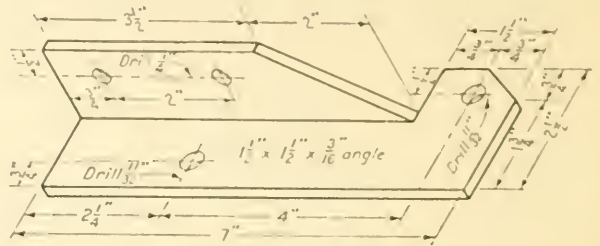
Lower rear throat-spring bracket, Massey-Harris corn binder
